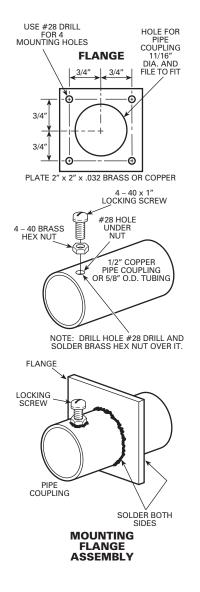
DETAILS AND DIMENSIONS for the mounting flange assembly.
